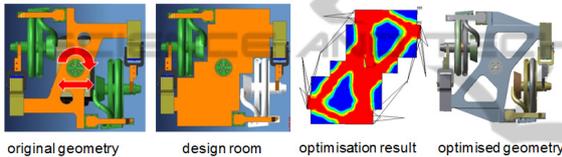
Topology optimisation of a tool changer of a grinding machine.
